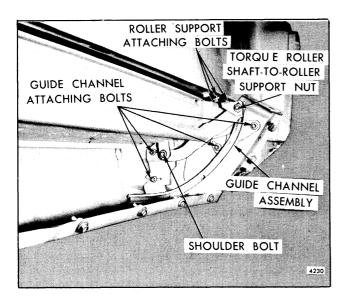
Tail Gate Guide Channel Assembly - Right
